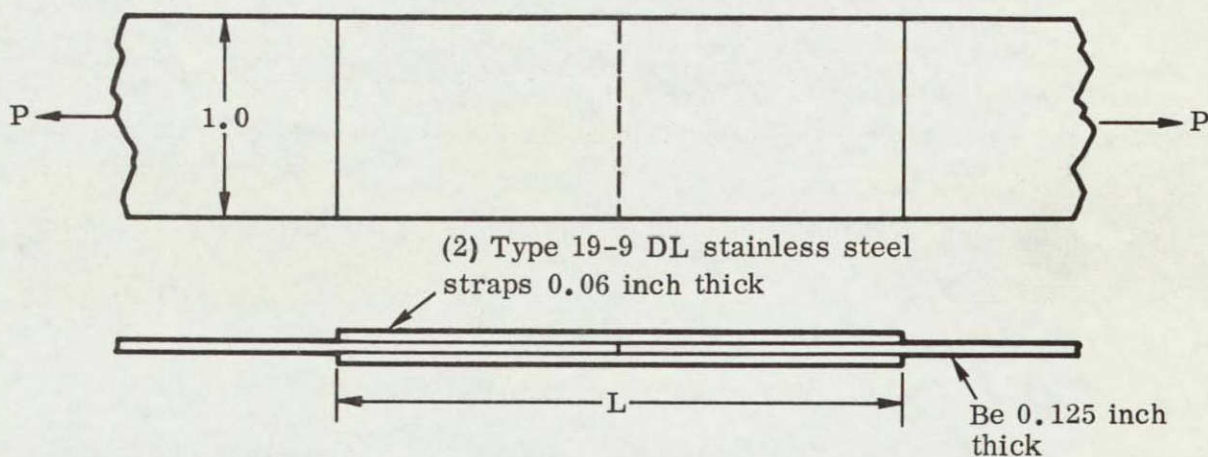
LAP JOINT TEST SPECIMEN (BL6)
